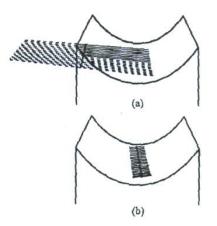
[2] Contact pattern for the worm gearing ZE: a) Unchanged worm gearing;
